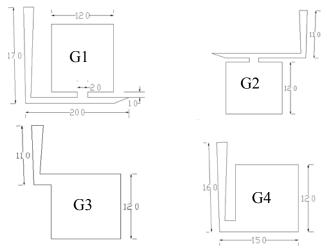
Pattern dimension for different gating system, all dimension are in mm.
